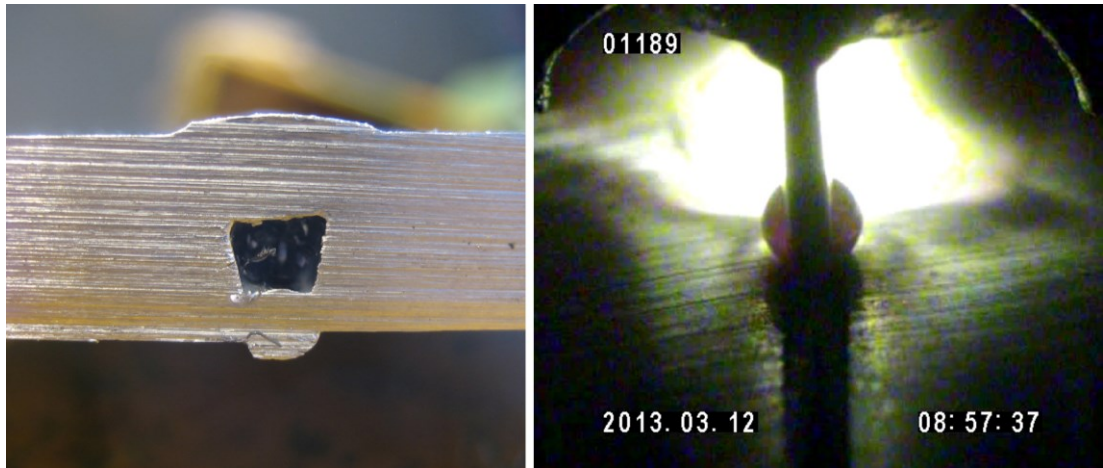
Porosity in 8 mm plate thickness was observed in preliminary PAW welding tests.
